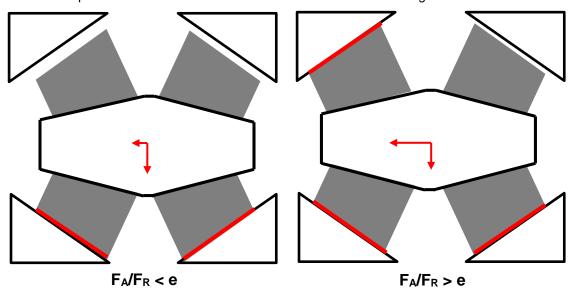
Cross-section of tapered roller bearing under radial and axial loads
